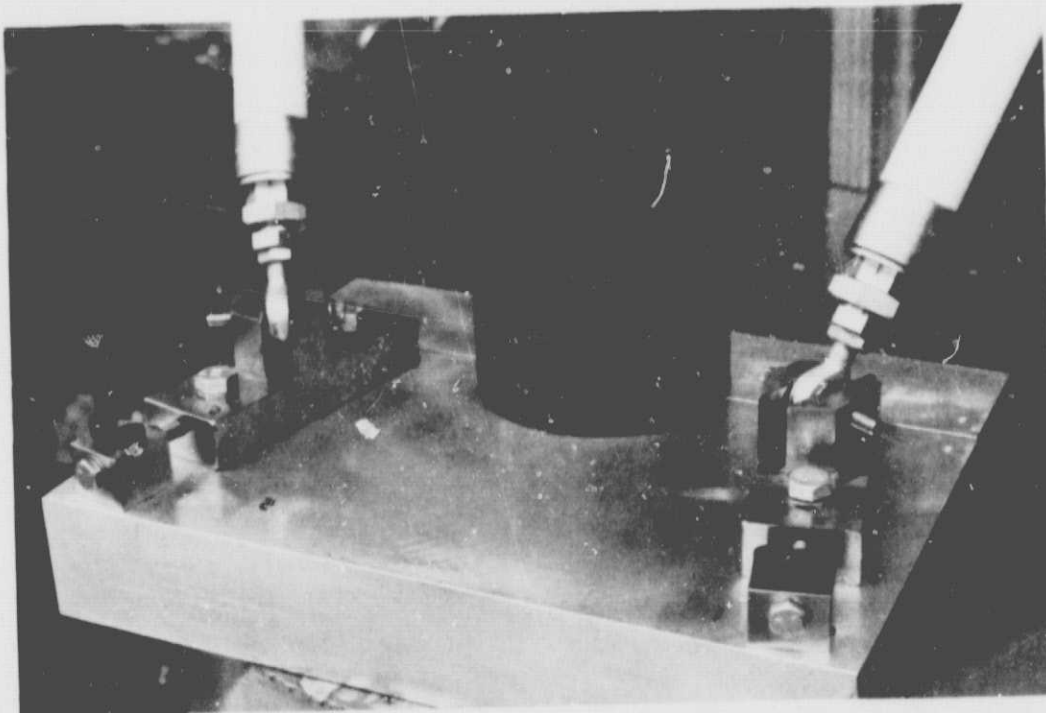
Vacuum Shell Adjustable Clevis Fittings
